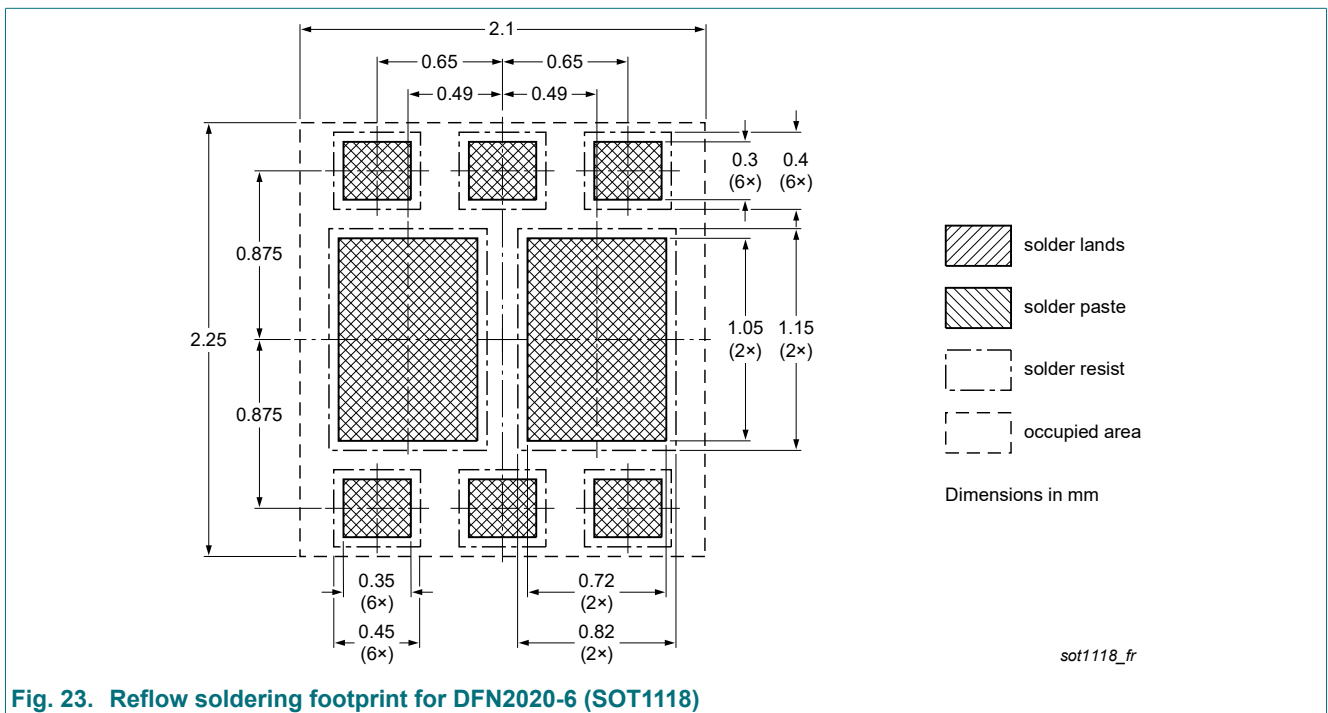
Reflow soldering footprint for DFN2020-6 (SOT1118)
